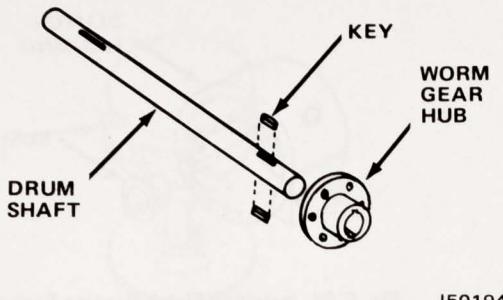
Installing Worm Gear Hub on Drum Shaft
